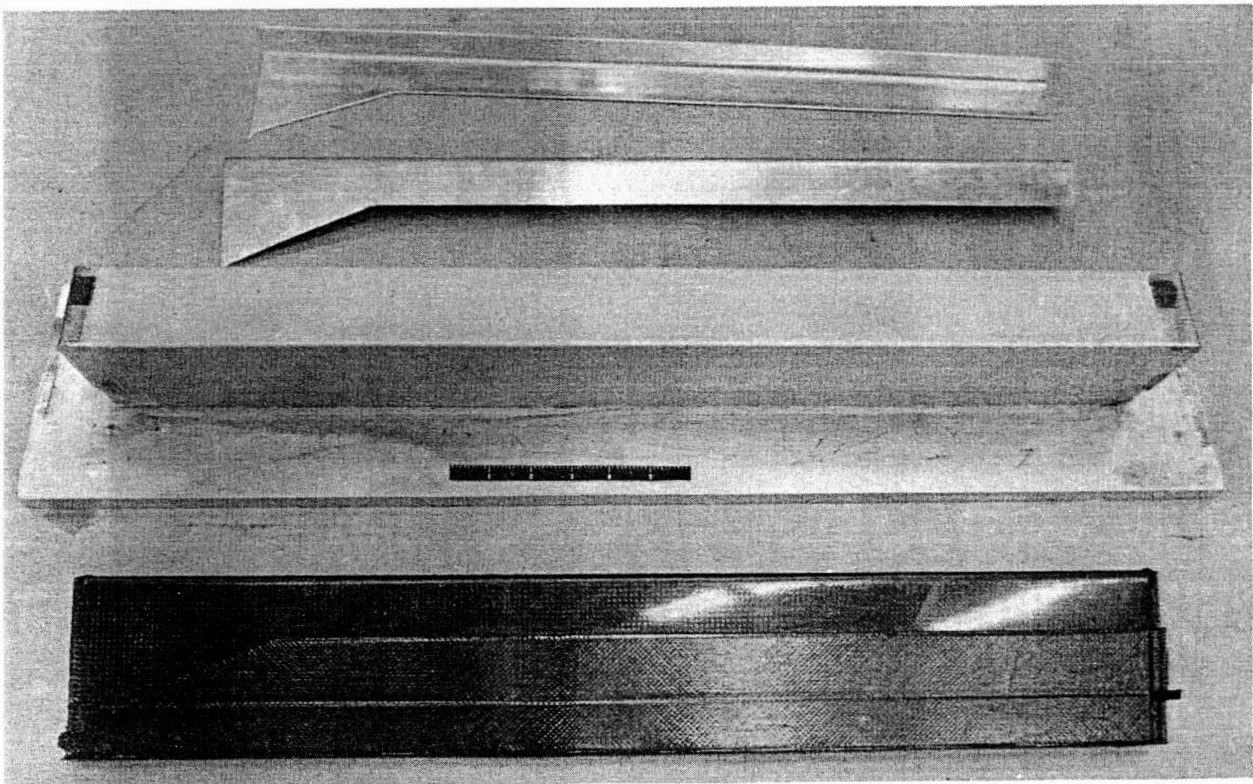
Rear-Spar Test Part Showing Finished Part With Tooling
